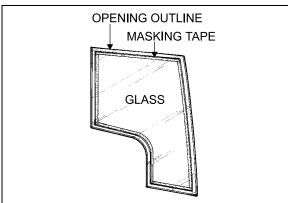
ADHESIVE-MOUNTED WINDOW
